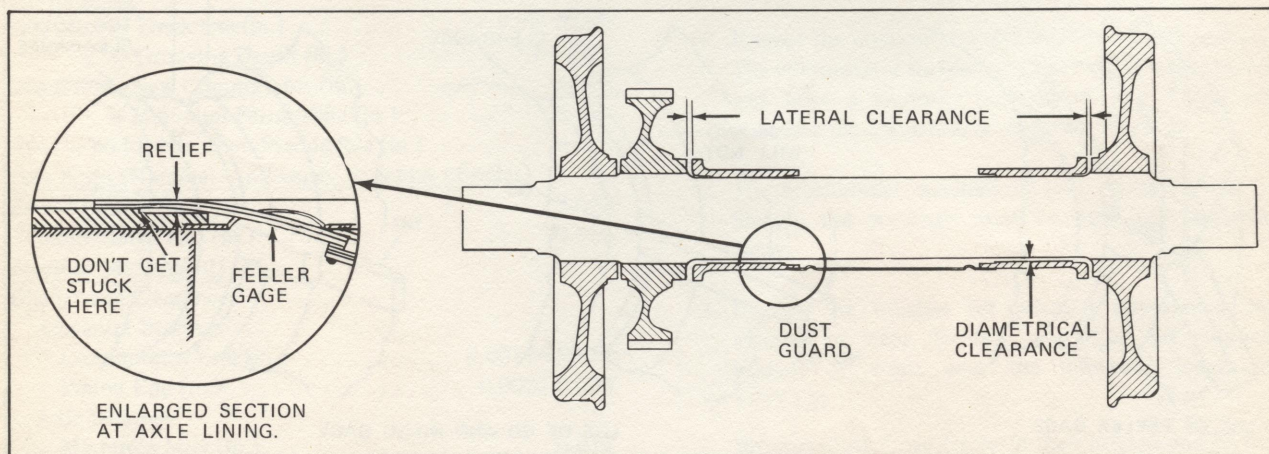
MEASURING DIAMETRICAL CLEARANCE OF LININGS.
